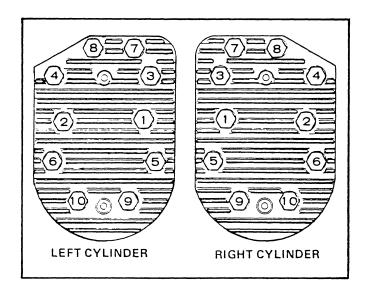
HEAD BOLT TIGHTENING SEQUENCE
